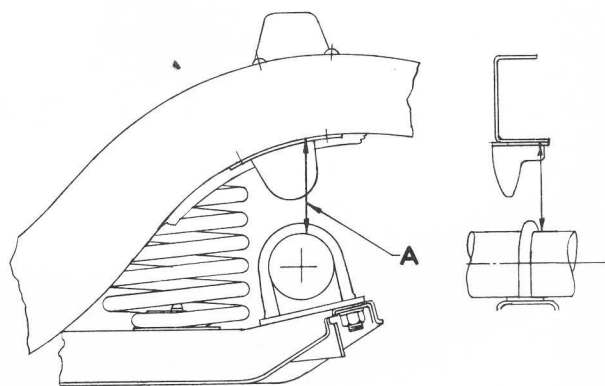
Rear Spring Trim Dimension—1948 Series 50-70
